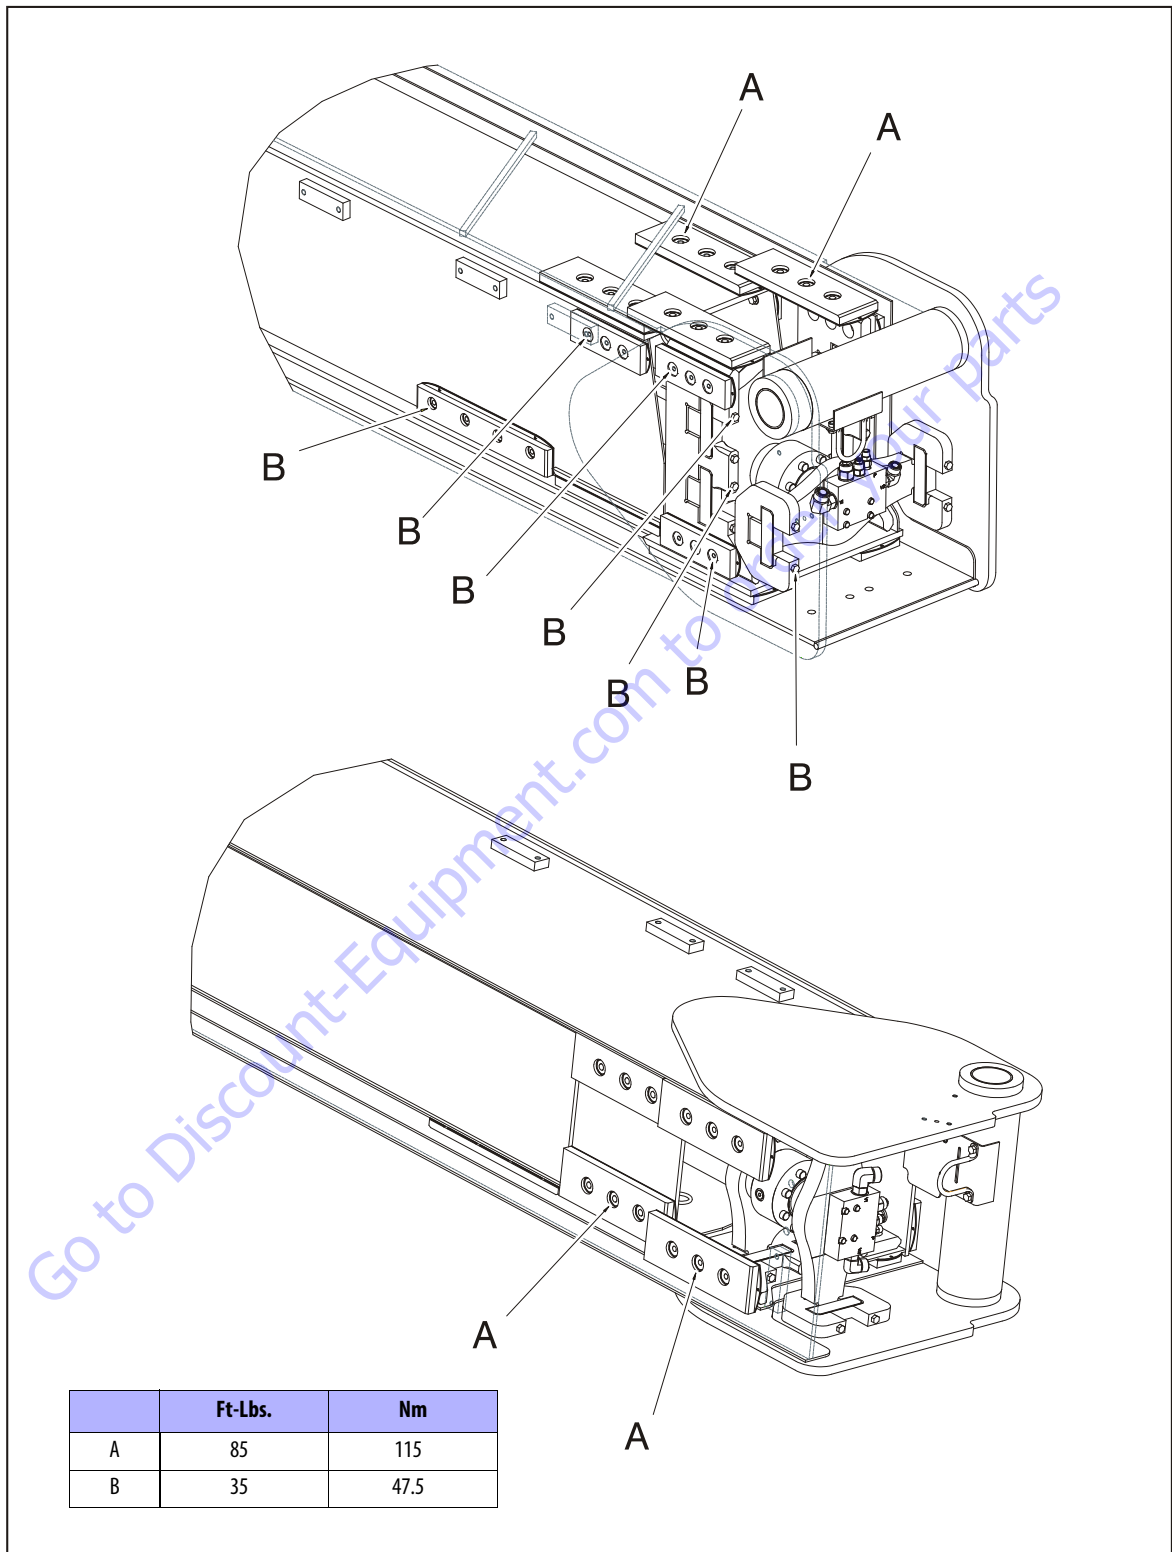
Tower Boom Assembly Torque Values - Sheet 2 of 2
